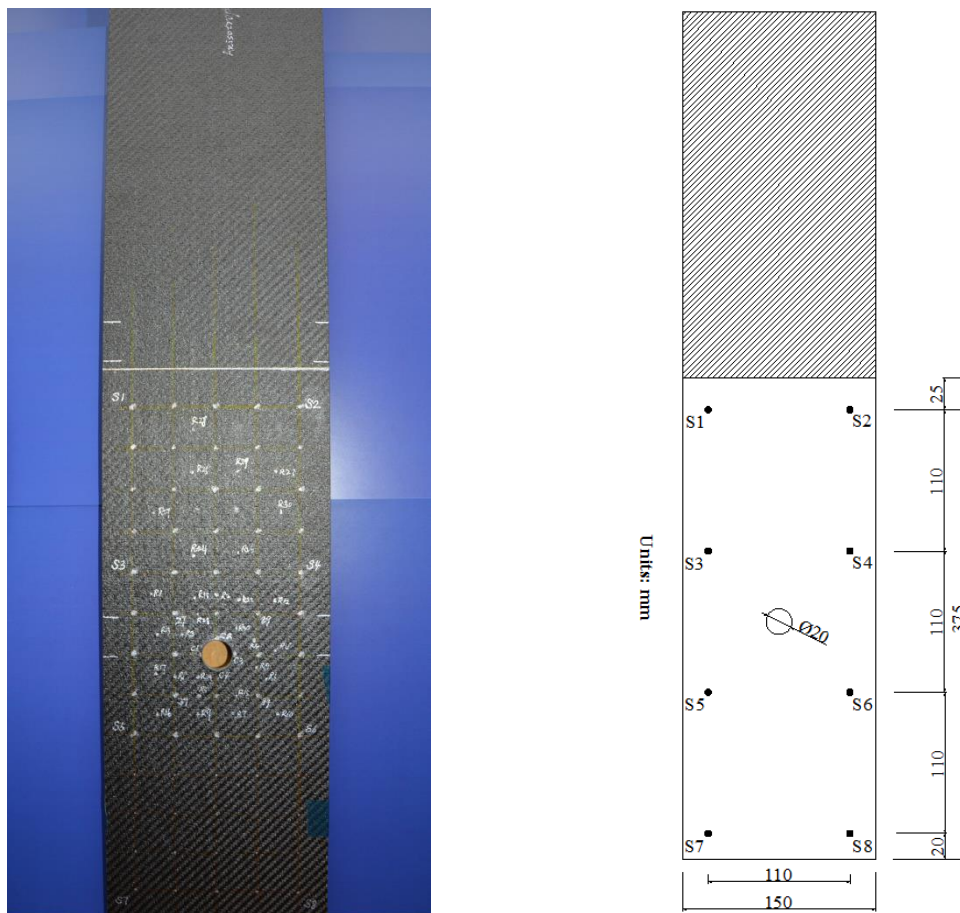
Geometry of the CFRP plate (Specimen 3) and its sensor layouts
